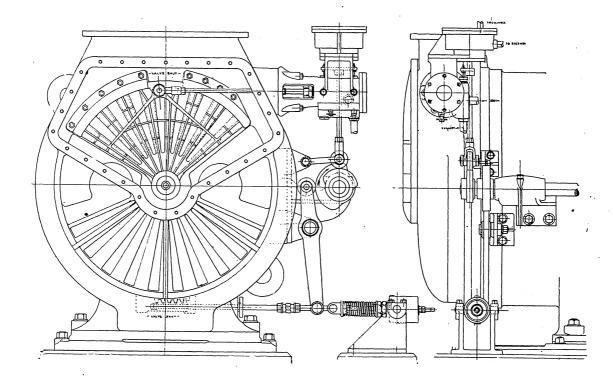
Automatic Air Valve, Bessemer Blowing Engine, Cambria Iron Company.
